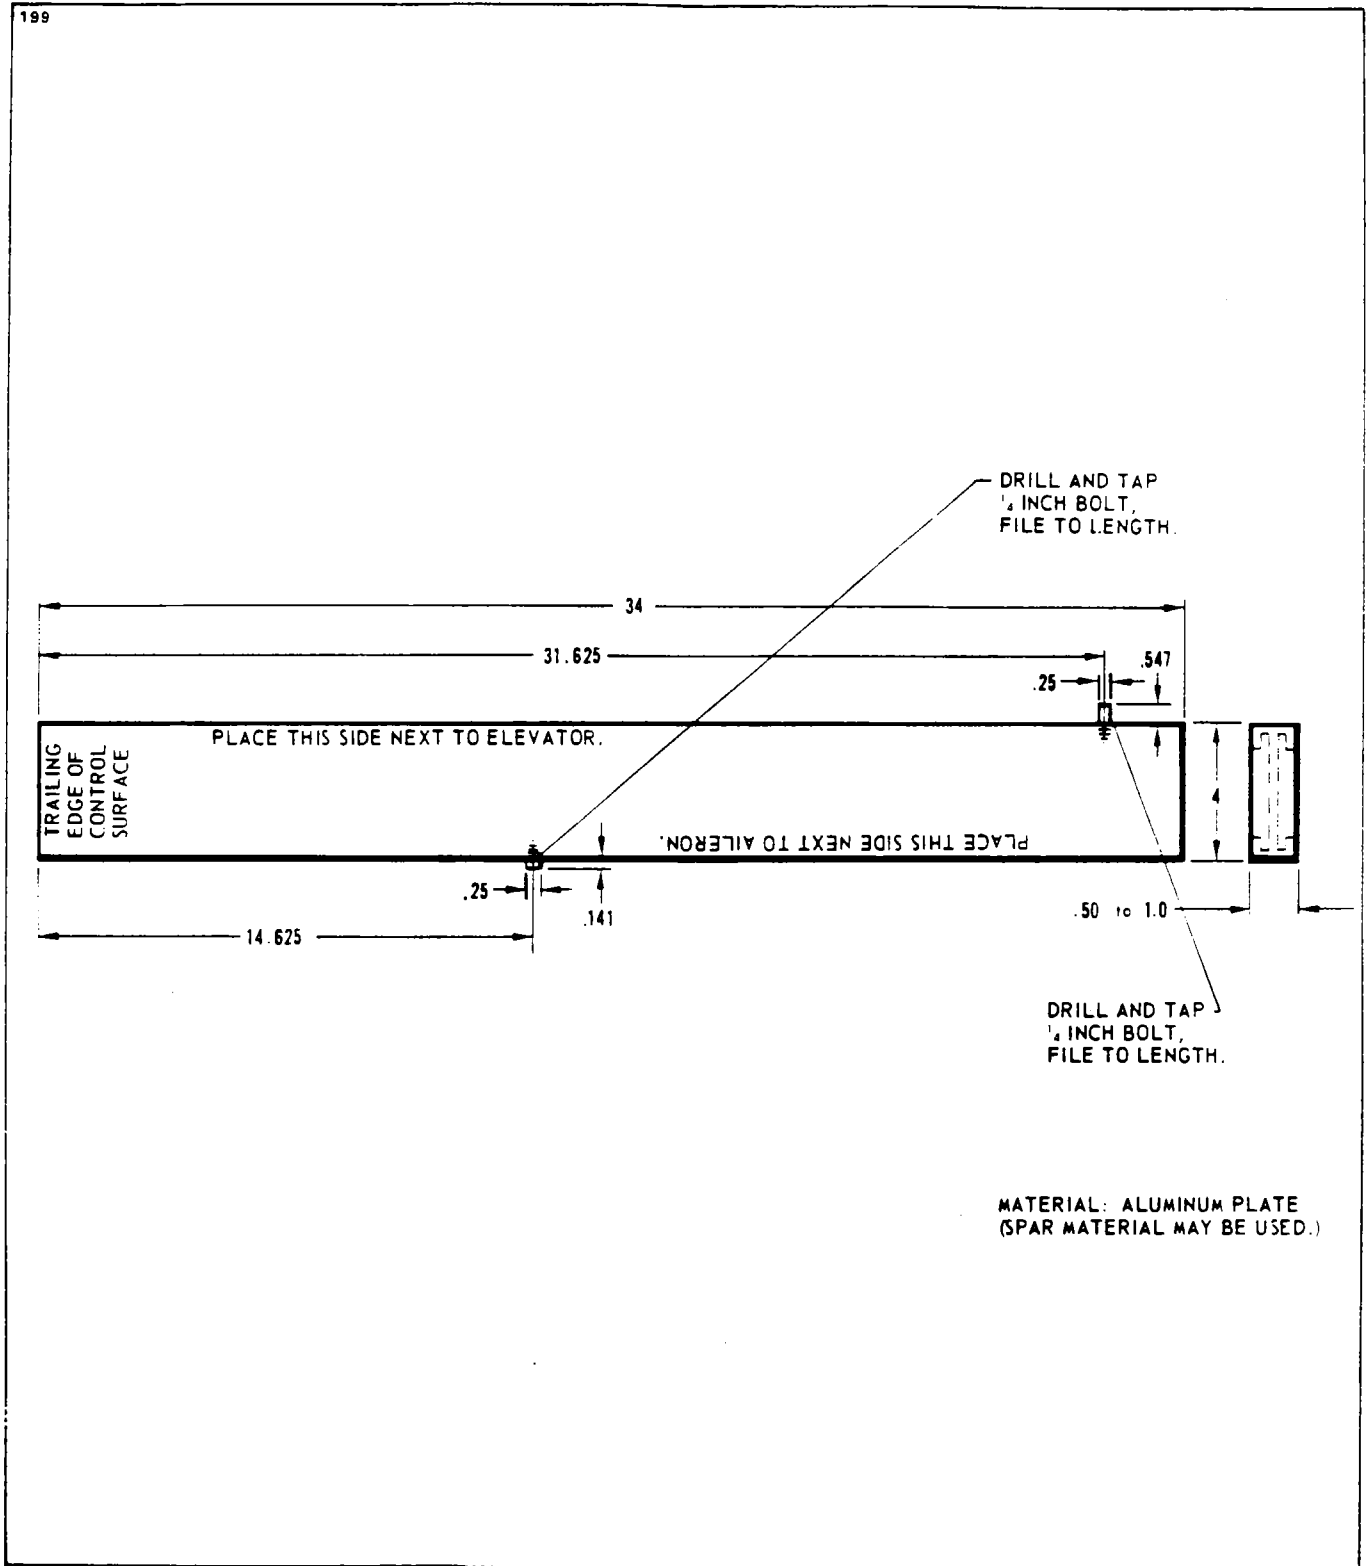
Fabricated Aileron and Elevator Rigging Tool
